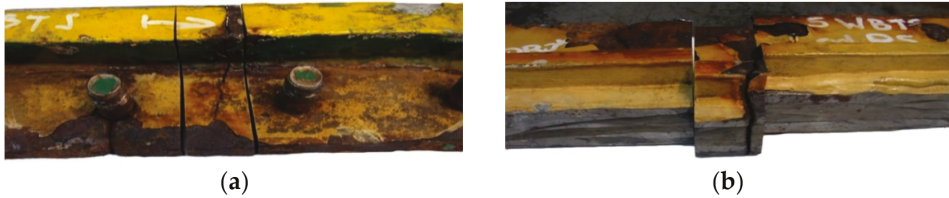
Macroscopic examination (handy-size bulk carrier 30185 DWT): (a) lid view of the manhole section marked 5WBTS and (b) bottom view of the manhole section marked 5WBTS.
